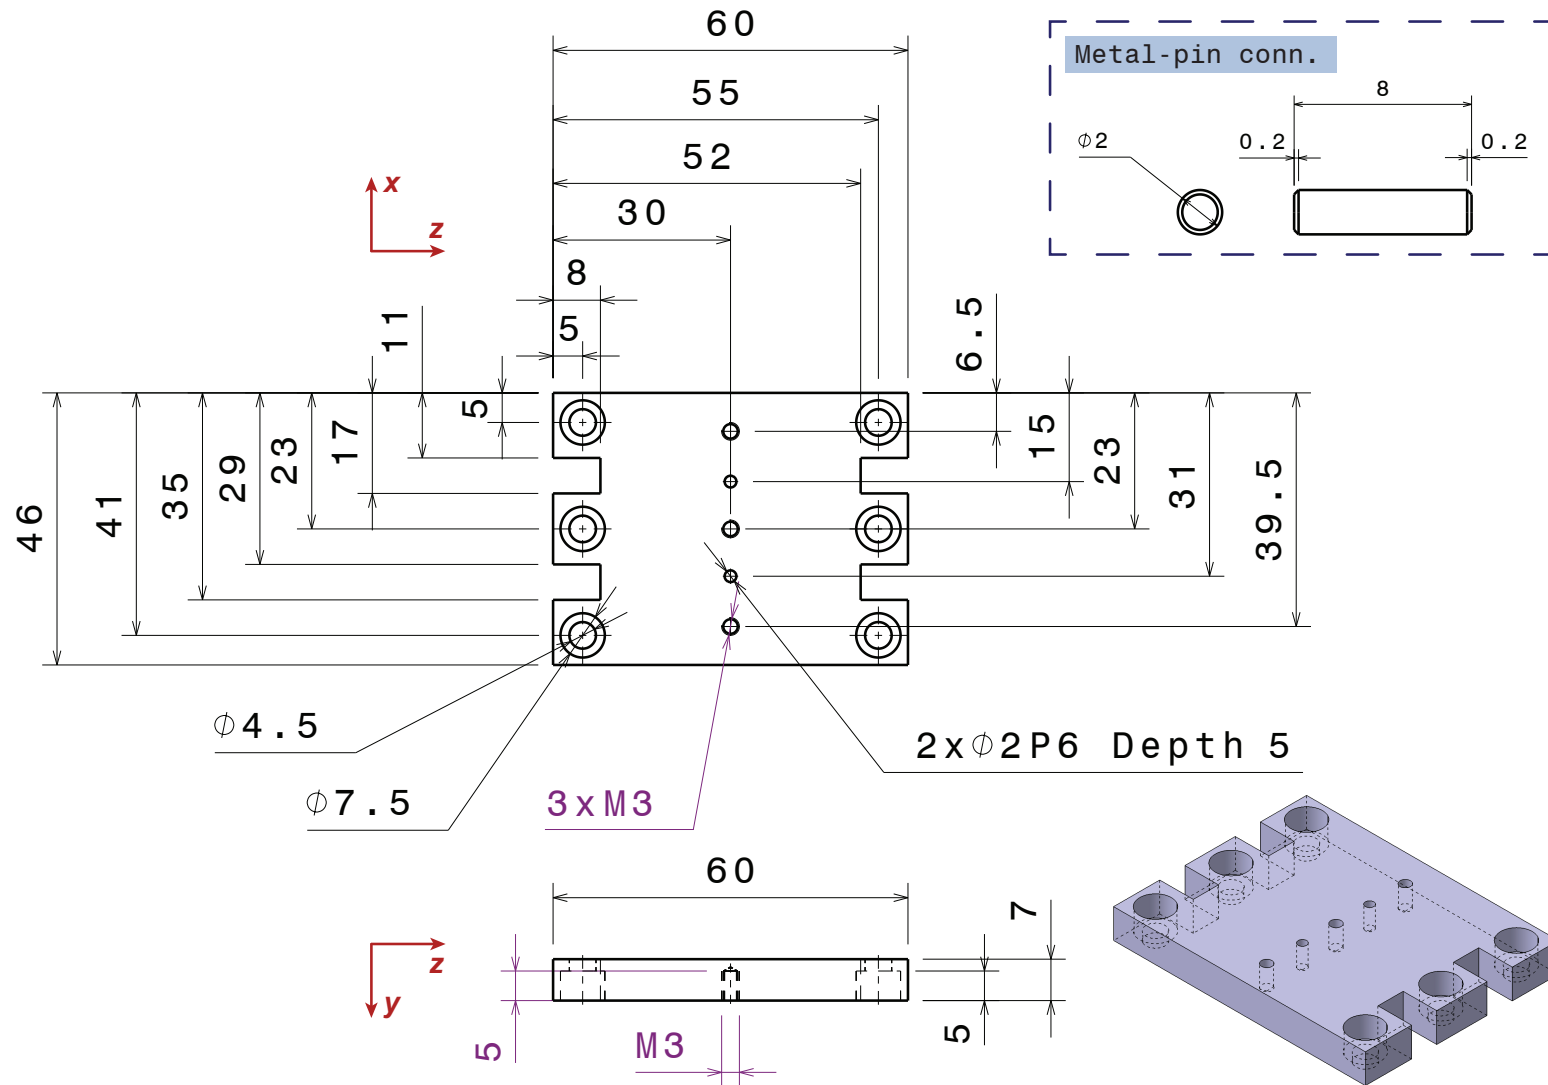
TA support: chip holder base plate CAD. (Material: Brass)
